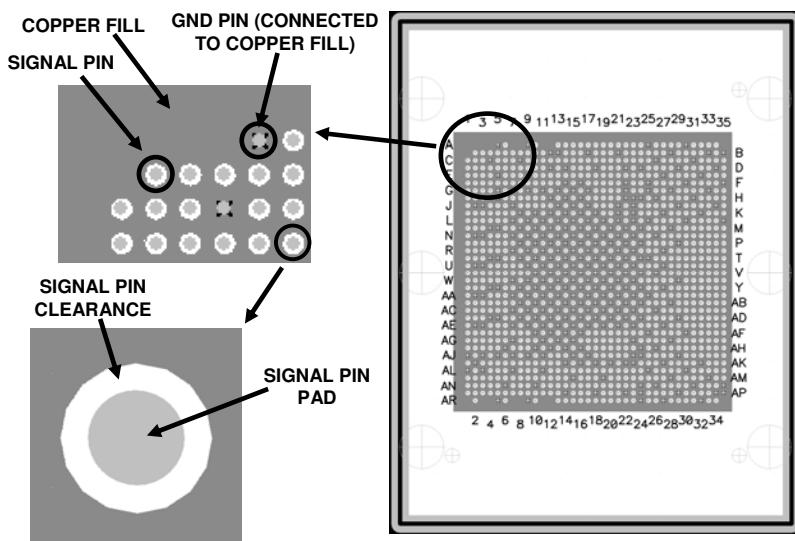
Description of the layout details for one example of a DUT socket interposer.
